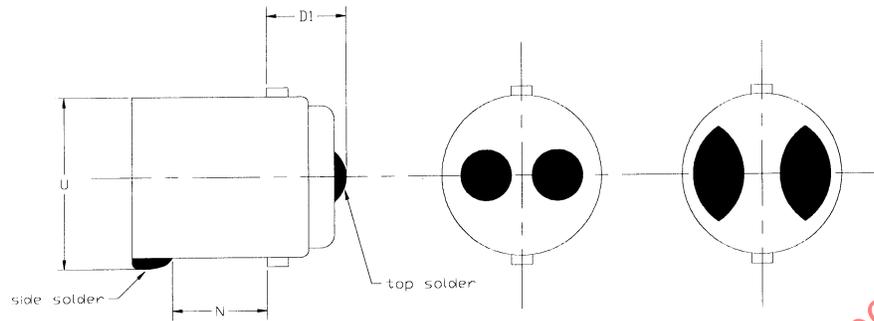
B—BA15d DIMENSIONS TO BE CONTROLLED ON A FINISHED BULB
